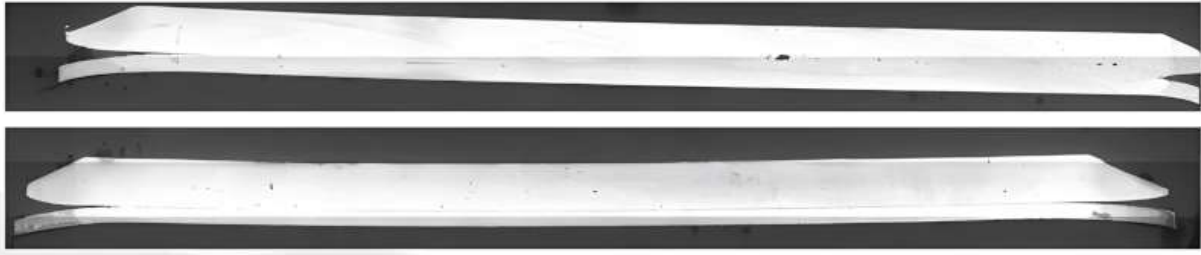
Macro metallographic inspection of resistance welding zone of bearing pad to cladding.
